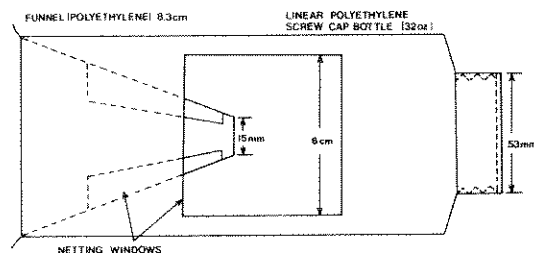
Design and dimensions for the fry-holding bottle; 32 oz is approximately 1 L.
